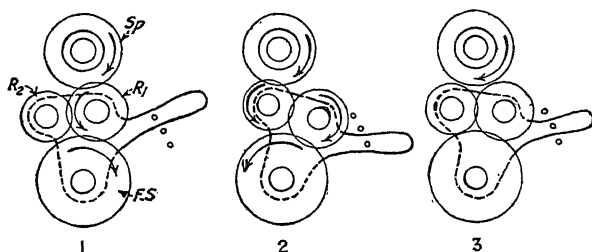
Illustrates operation of reverse gears or tumbler gears.
